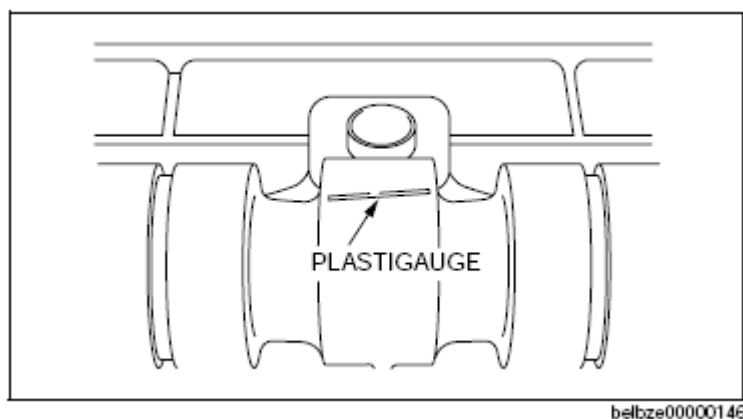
Positioning Plastigauge Atop Journals In Axial Direction
